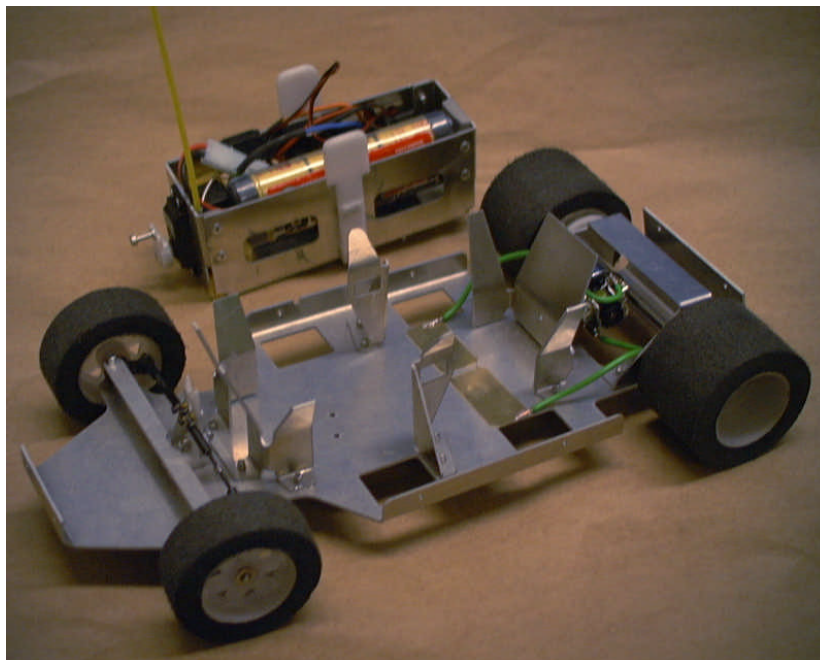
The chassis of the car shows full sheet metal construction with minimum use of machined components. The riveted chassis is simple and to make and rugged. The control box visible in the background and features drop-in loading from the top for quick pit stops.
